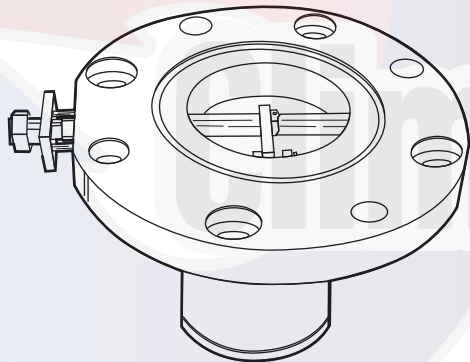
A — Suction Service Valve Locking Device, Closed and Unlocked (Flooded Cooler Units)
